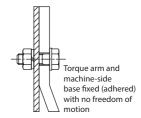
Method of Fixing When the Product Does Not Move in the Opposite Direction of the Machine
